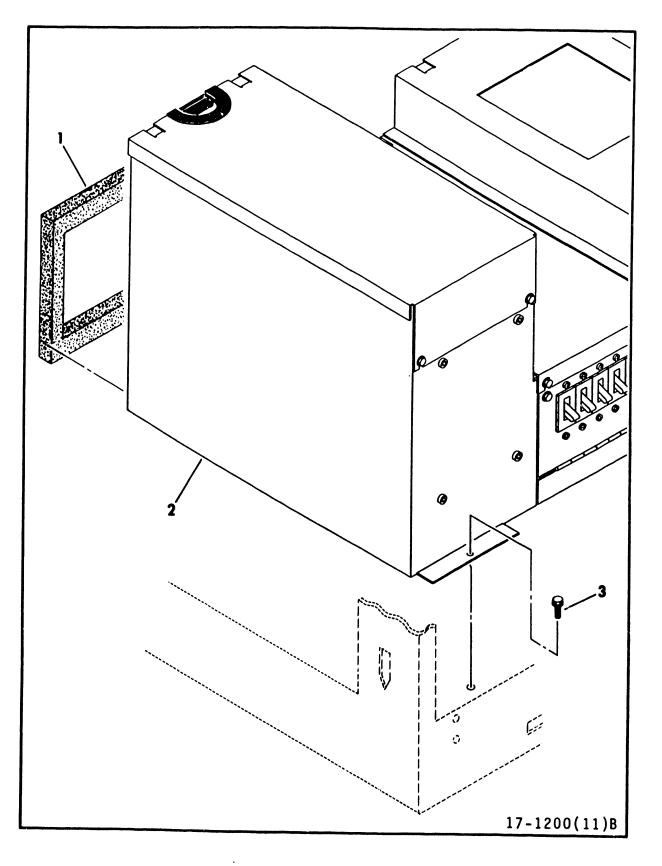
A-12. Frame and Air Assembly (Sheet 13)
